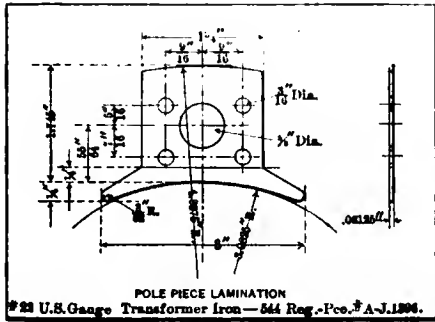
Laminated pole piece, shape of horns, and method of riveting
